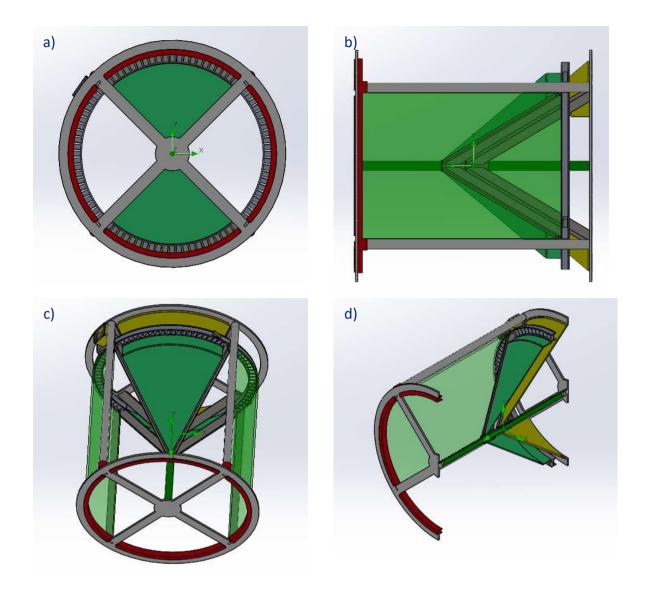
Version 4 of the prototype in catch position: a) Front view b) side view: c) 3D view d) 3D isometric section view
